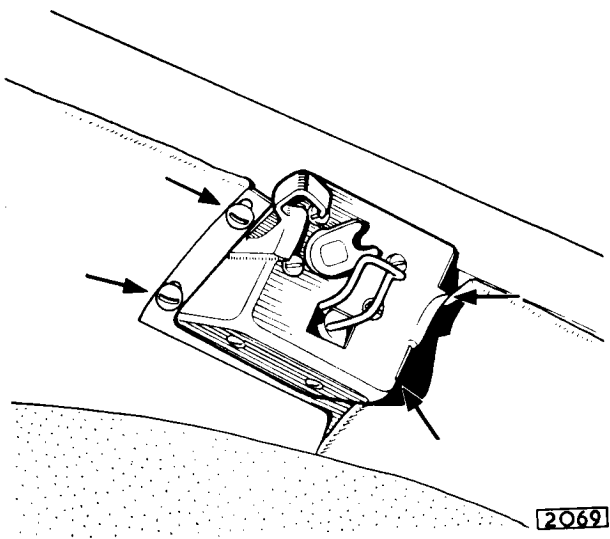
The adjustment screws for the luggage compartment lock (Fixed Head Coupe).
